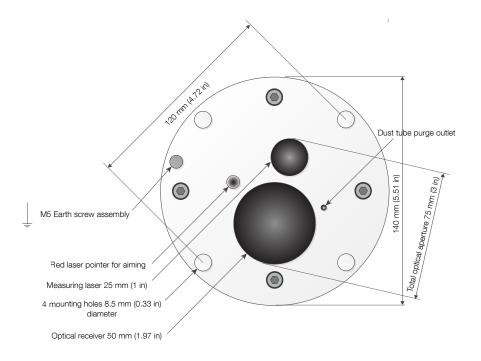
3. Mechanical Dimensions of the Standard LM80 Level Transmitter (2)
